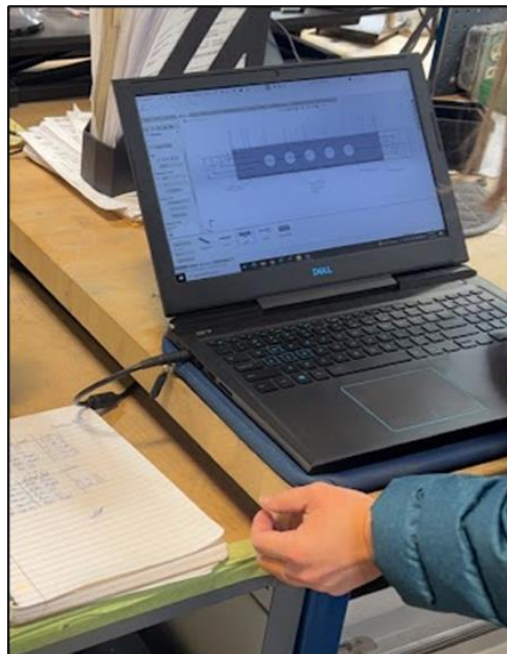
Participant inspecting part using MBD model (Photo by Carson Pardue)
